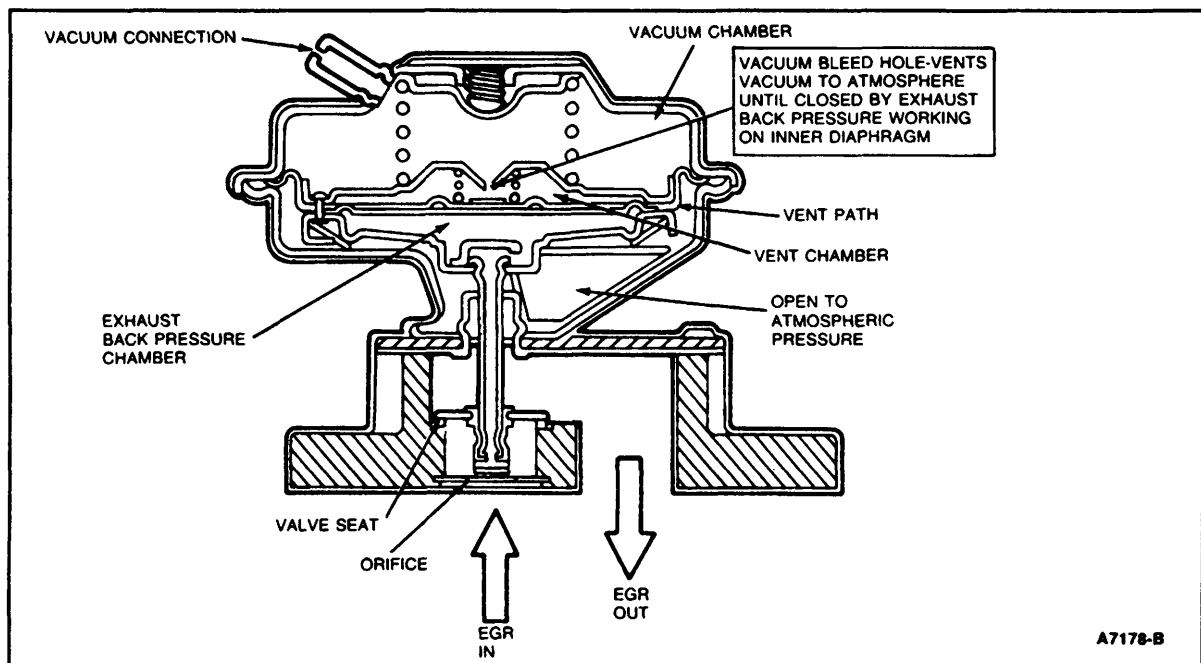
Integral Back Pressure Transducer EGR Valve (9D448)
